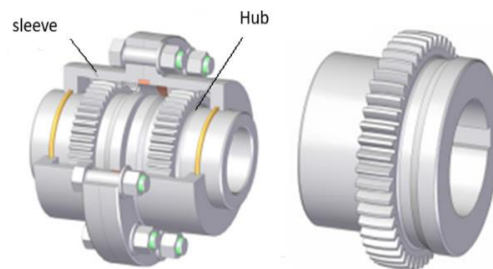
a) Gear Coupling b) Flange from Gear Coupling
